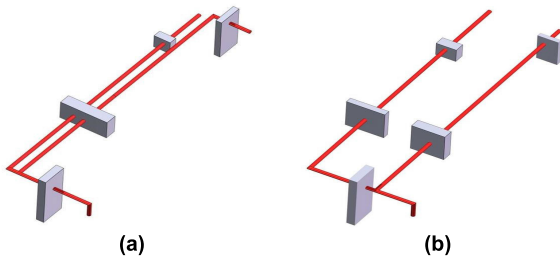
Support equipment layout. (a) Shared support bracket scenario. (b) Non-shared support bracket scenario.
